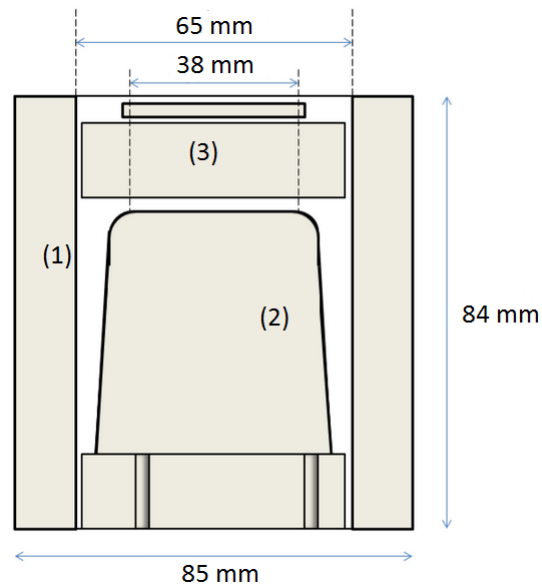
Cross-section of the mould used for making Rogowski test objects [2, p. 18]
